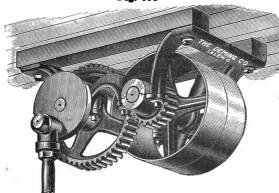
is a geared counter-shaft for heavier duty, and may be used as shown or in an inverted position. It is intended for use with large working heads, such as Figs. 435, 439, also Pumps 491, 487, etc. Made in two sizes. Wood frame is not furnished.
